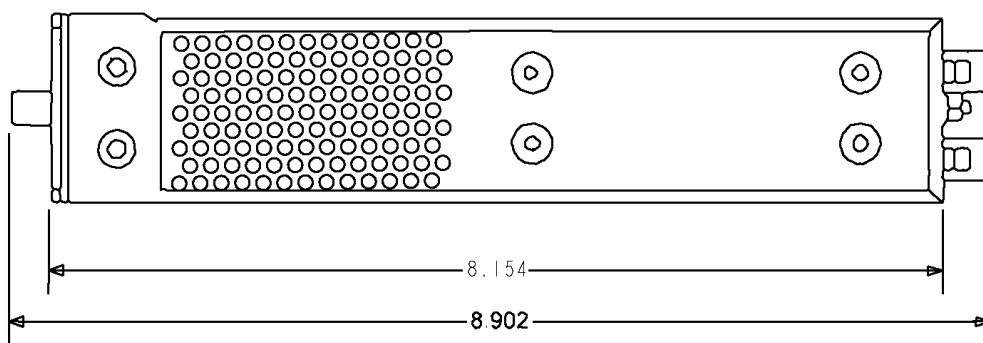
2 Pack MDA Ancillary Rack Physical Dimensions (Side View)
